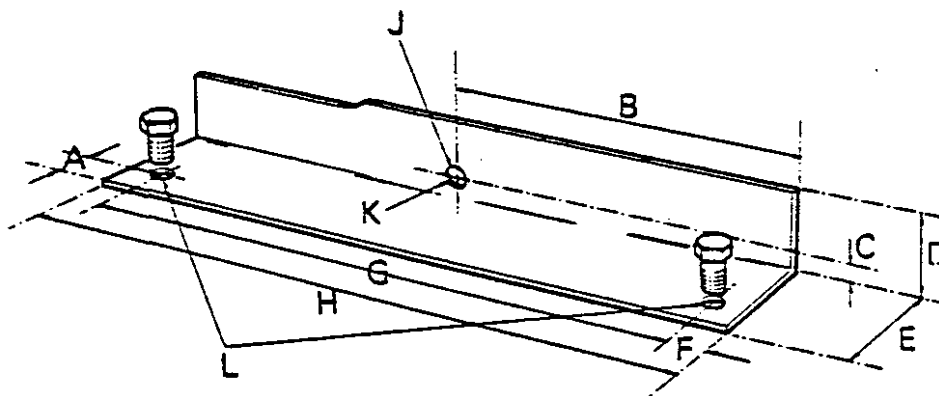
GEARBOX TO REAR AXLE STEADY BRACKET
